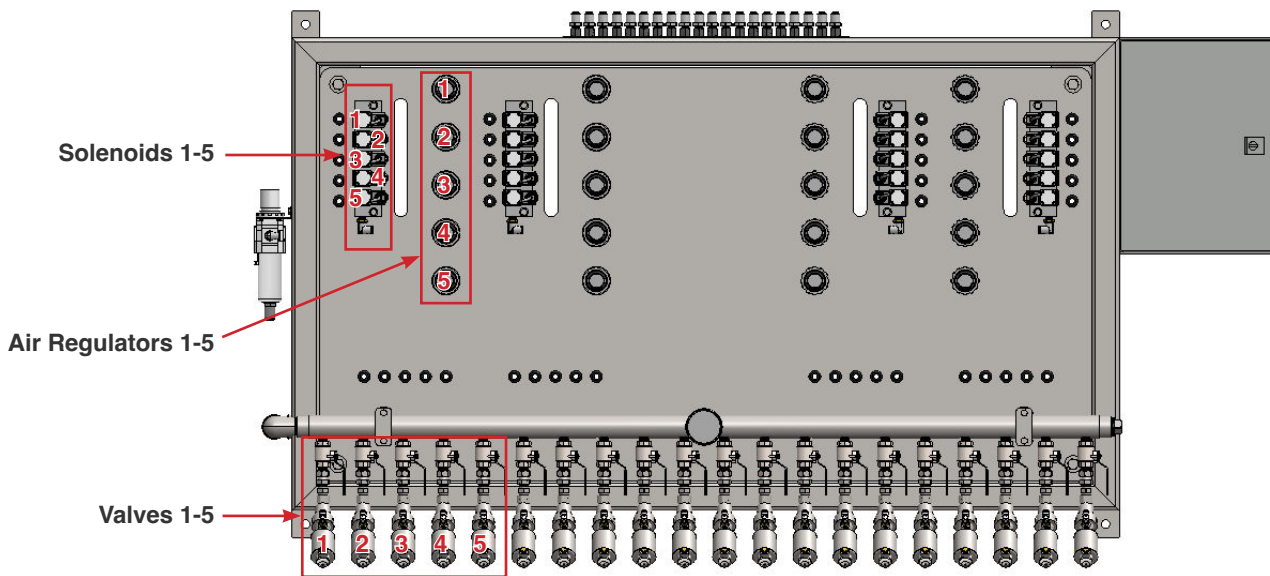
1 - Solenoid, air regulator, and valve alignment
